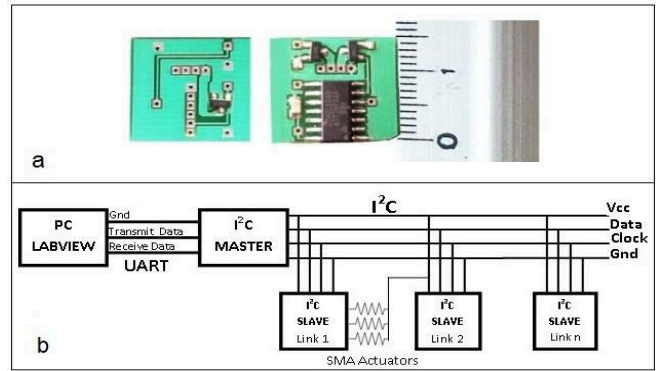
(a)Top and bottom layer (dimensions in cm) (b) Bus system
